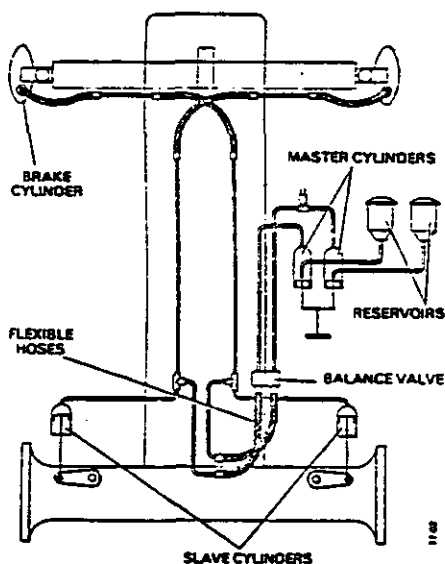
HYDRAULIC BRAKE SYSTEM
